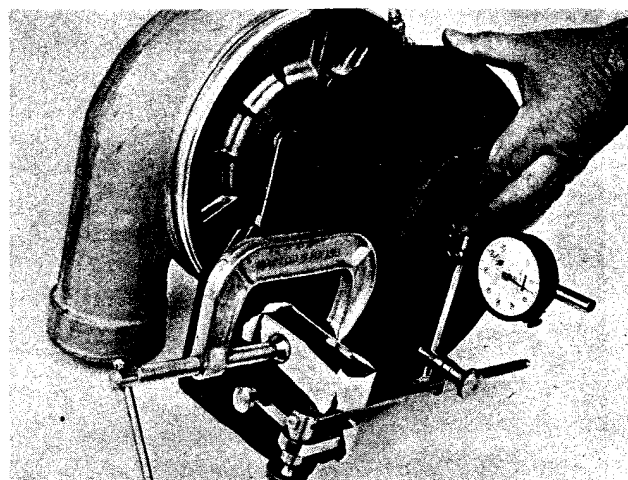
, (TA-47). Checking turbocharger end clearance
